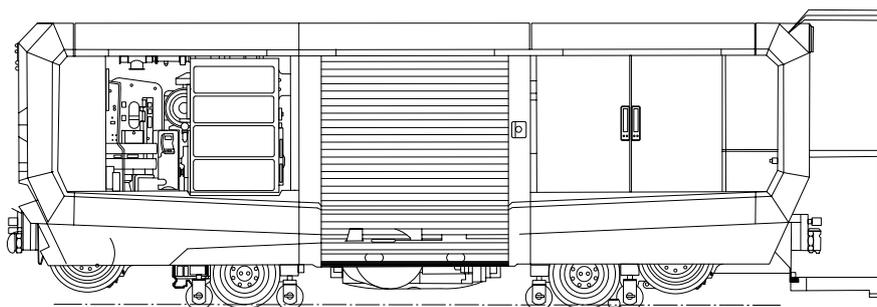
Railbound machine without running mode - Demountable machine - Tamper
